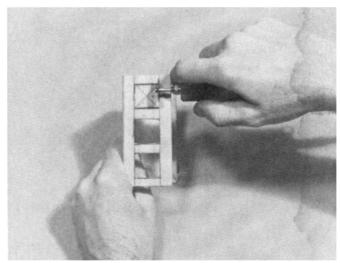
15/16" square holes are required for the receptacles. These are most easily cut using a nibbler tool or dremel mototool with a cutting wheel.
